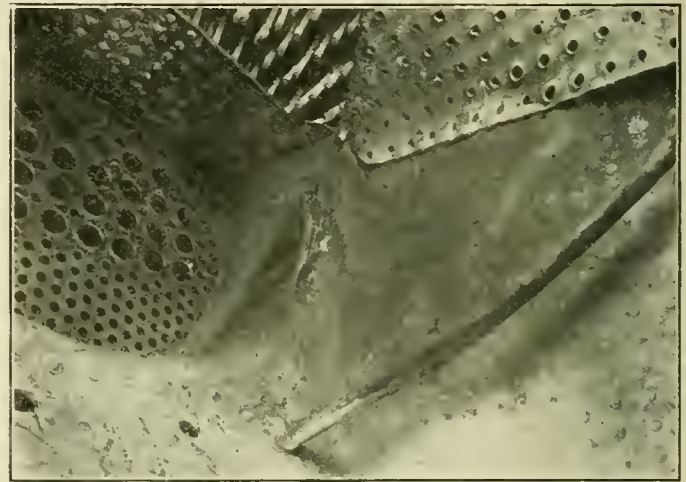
Showing Crown Sheet Which Failed Due to Low Water
